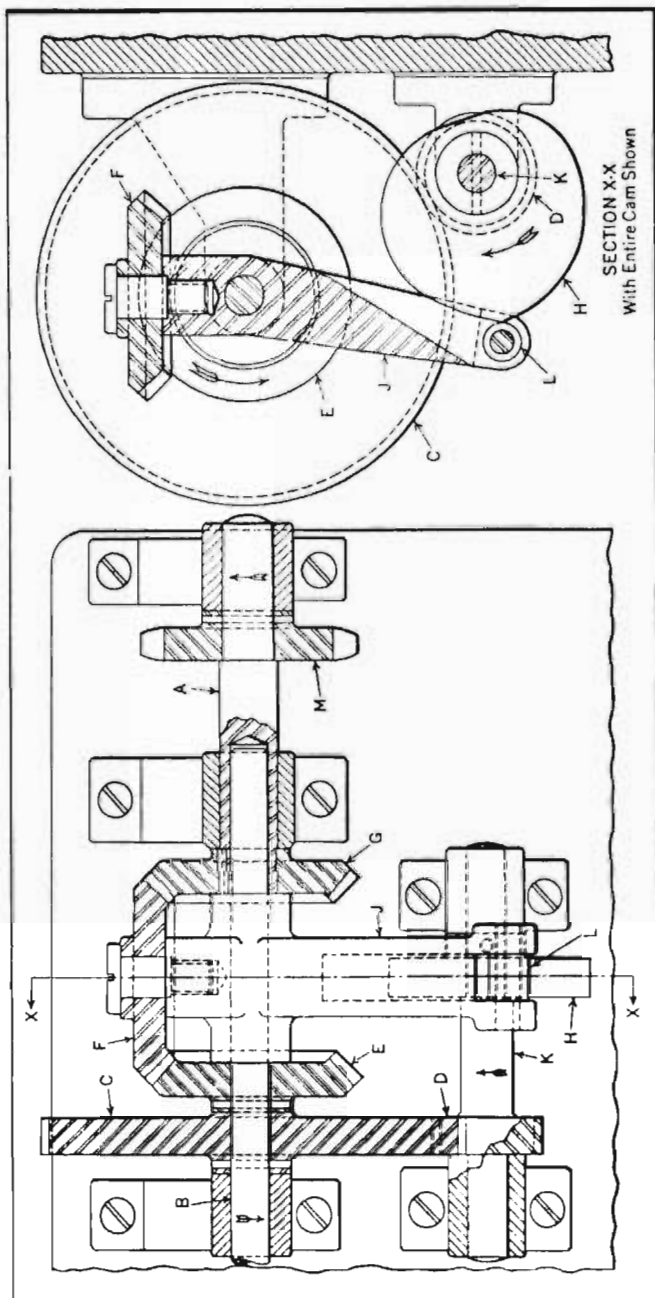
Sprocket Drive for Conveyor with Mechanism that Causes Conveyor to Dwell at Operation Stations without Starting or Stopping Shock
